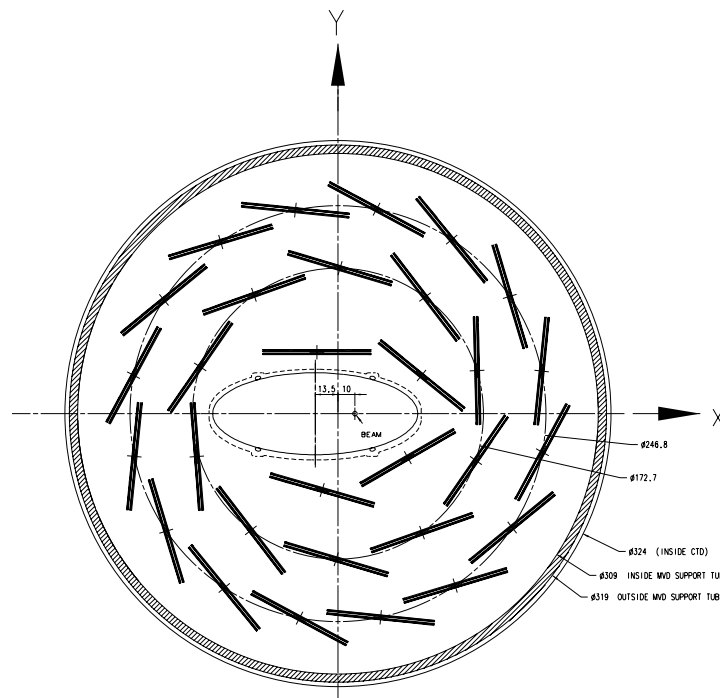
BMVD section: 3 superlayers around beam pipe are shown.
